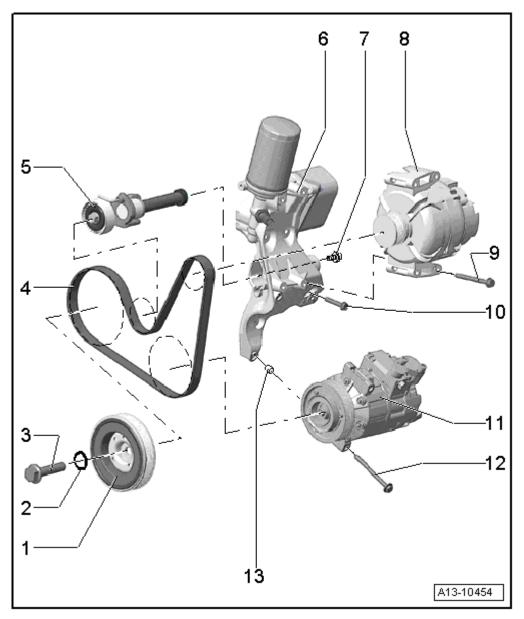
Identifying Ribbed Belt Drive Assembly Overview Courtesy of AUDI OF AMERICA, LLC
